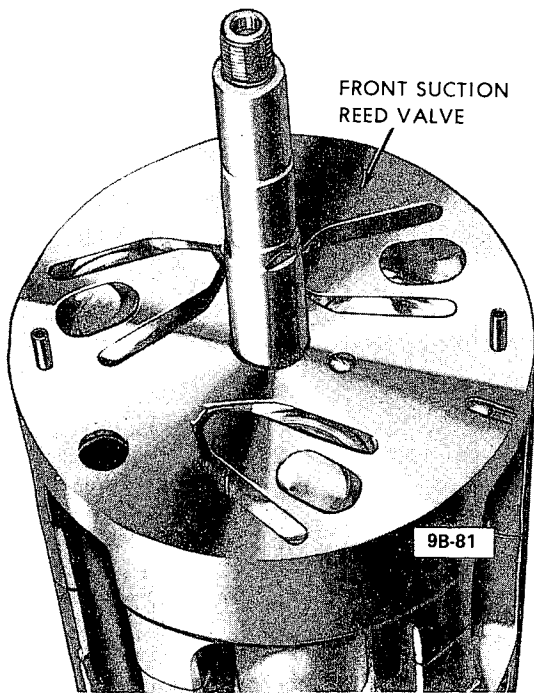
B-107 Front Suction Valve Reed Disc Installed - 6 Cylinder Compressor
